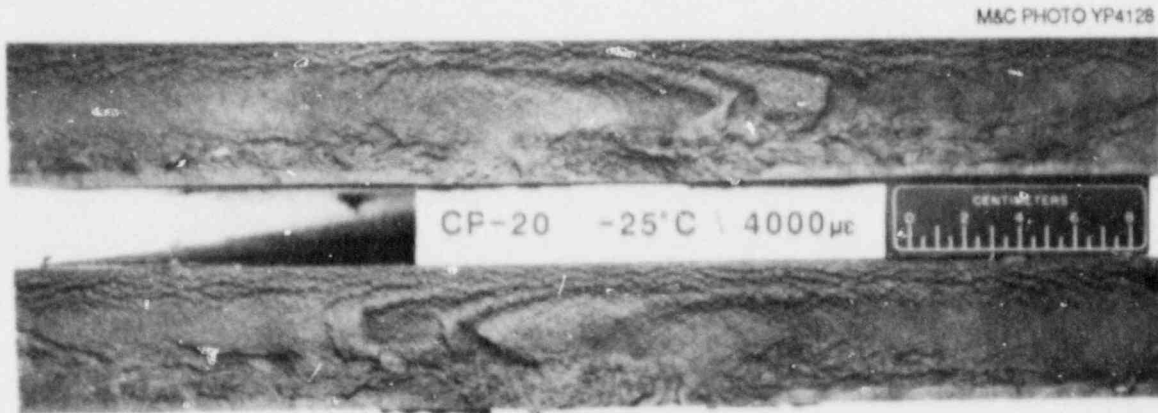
Fracture surfaces of plate CP-20.
